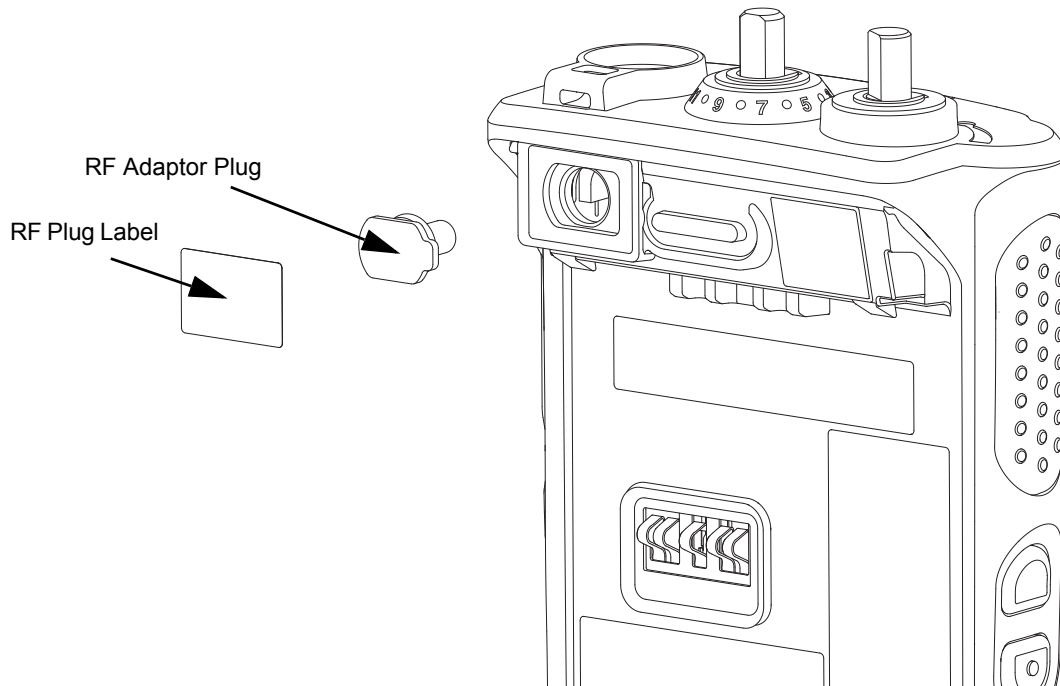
RF Plug Label and RF Adaptor Plug Removal
